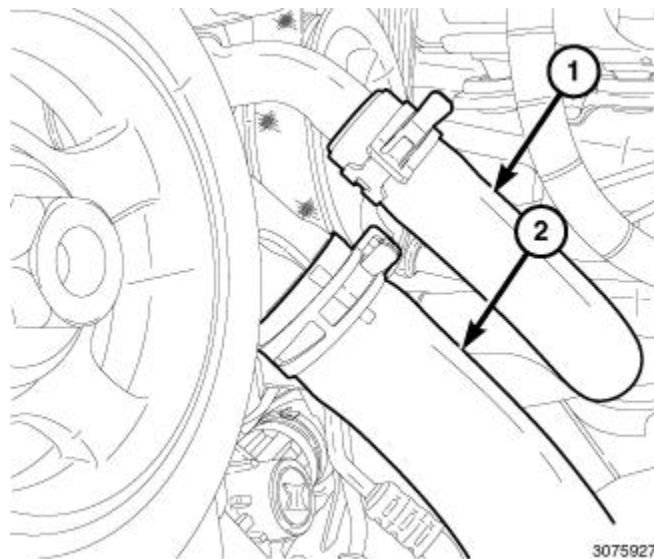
Lower Heater Core Return Hose & Lower Radiator Hose
